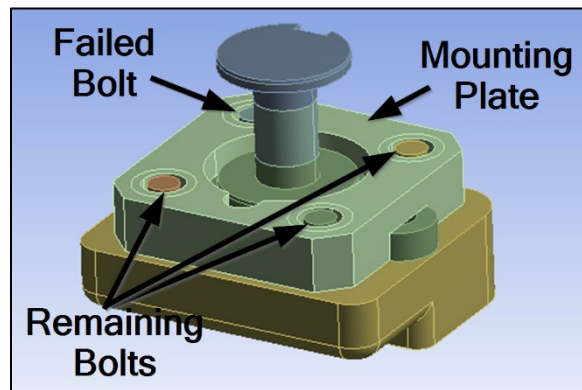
Isolation Valve Mounting Plate Failsafe Bolt Condition
